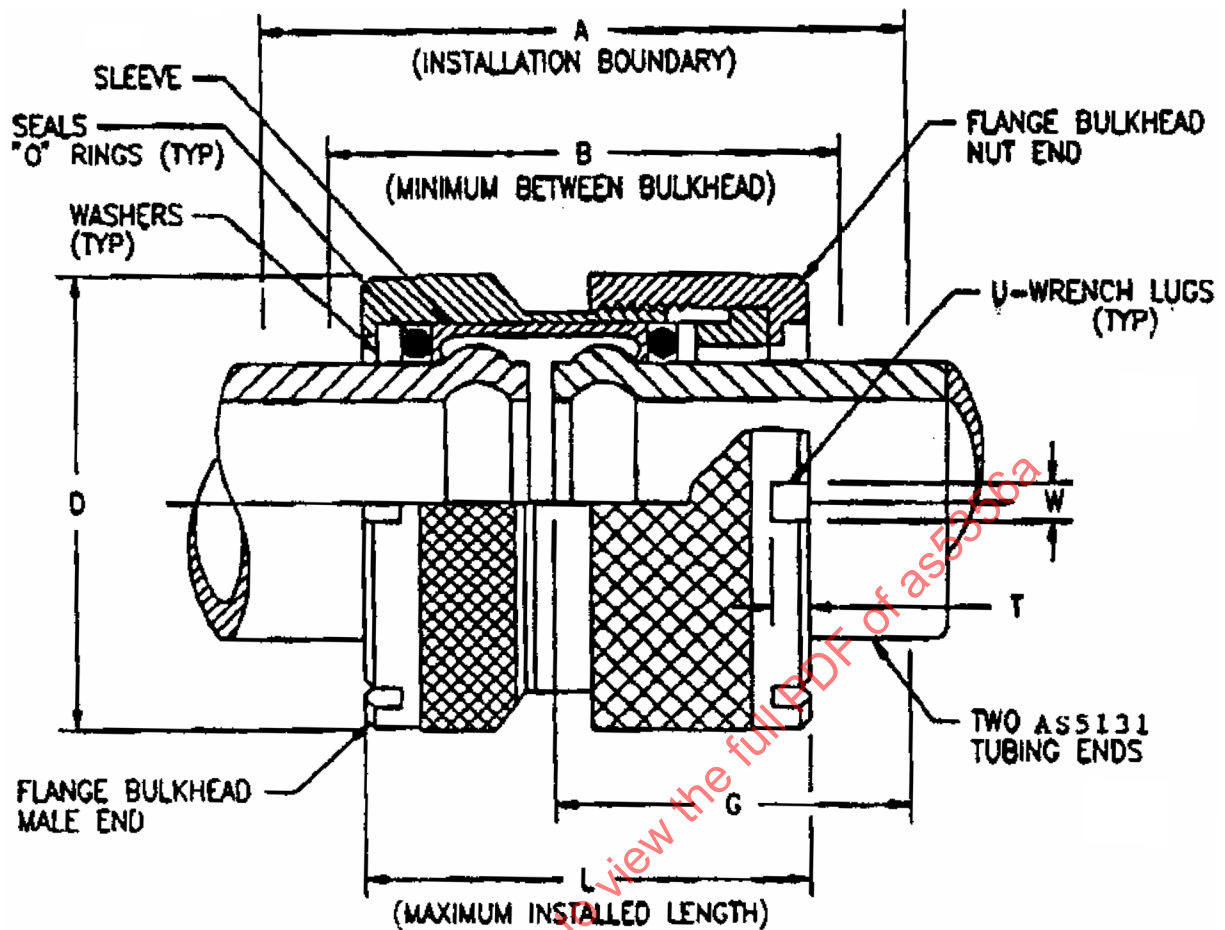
Wrenching Features Typical Installation of Type 1 Fuel Coupling
